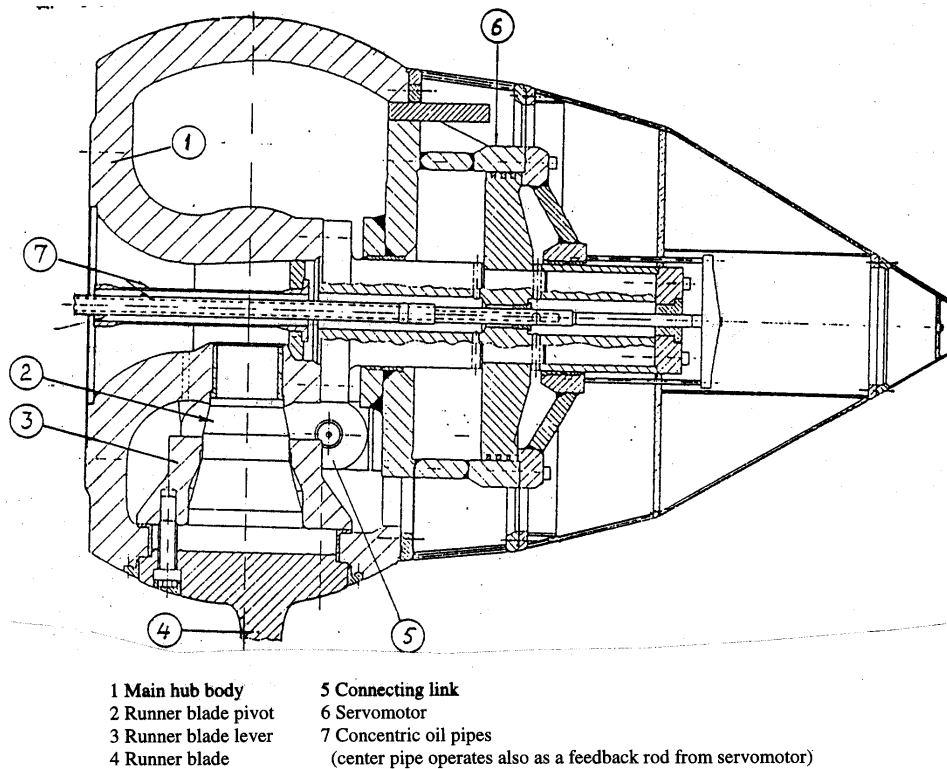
Runner hub for a Kaplan Bulb turbine or a Kaplan turbine (courtesy KVÆRNER)
